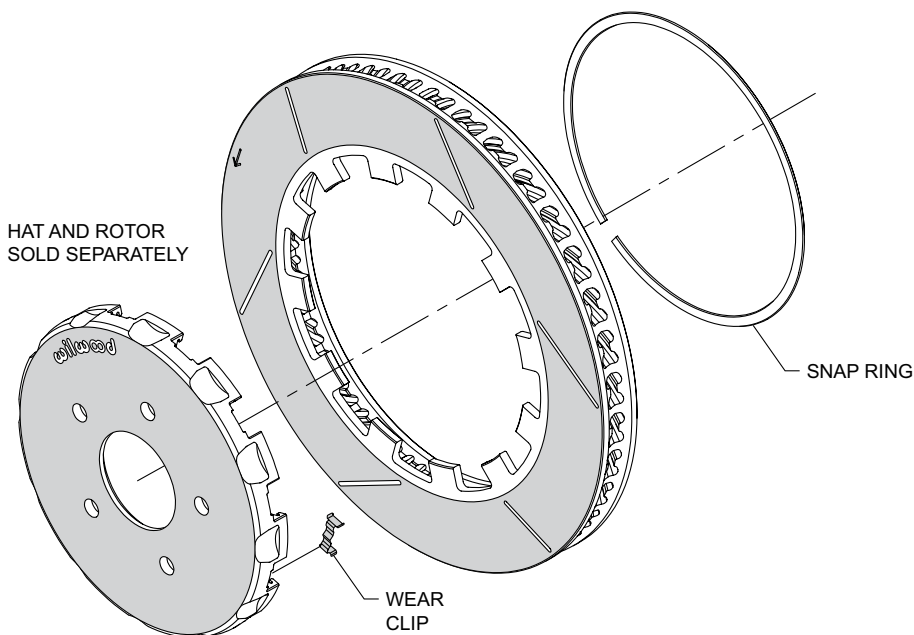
Typical Dynamic Lug Drive Rotor Assembly
